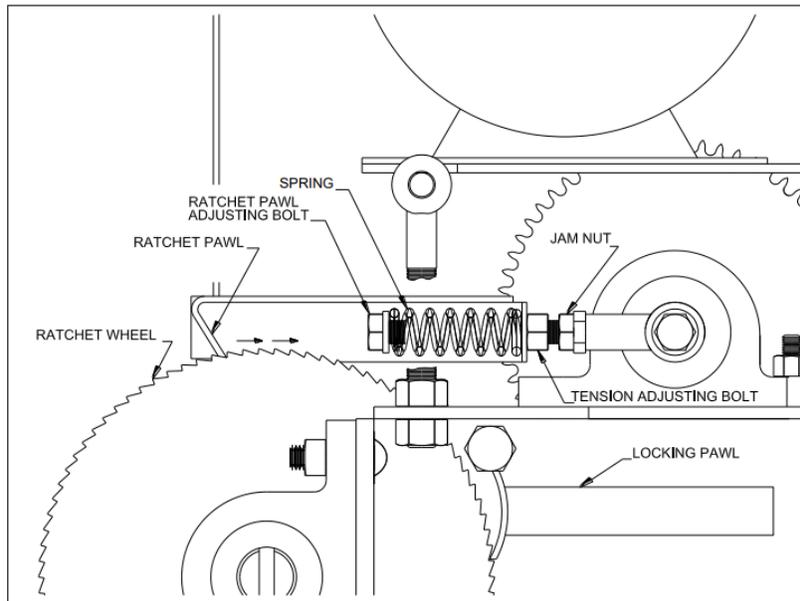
The ratcheting gear mechanism that drives the sweep auger drive shaft (Valmetal Owner’s Manual).
